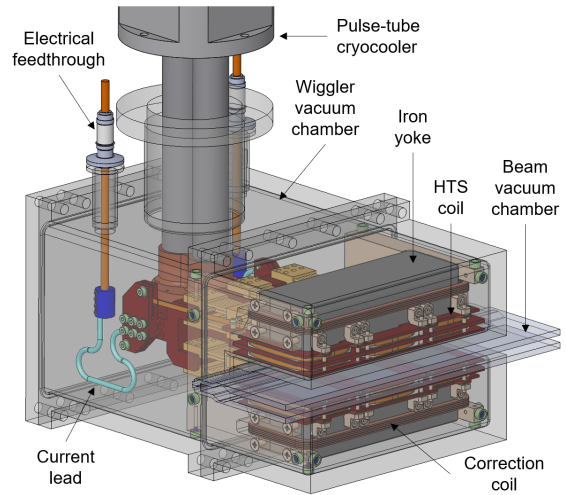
HTS superconducting wiggler including the magnet assembly, the cryocooler cold head, and the vacuum chamber.
